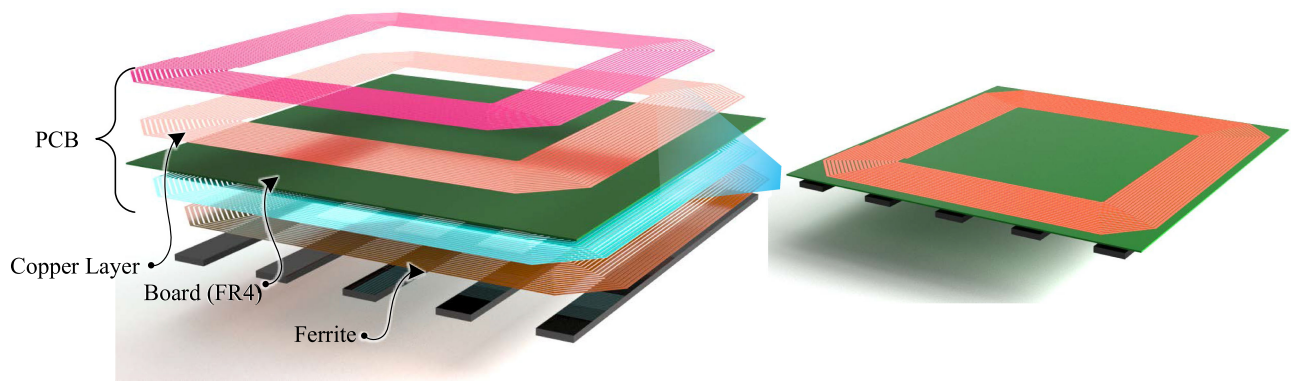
The proposed magnetic pad made by multi-layer PCB.
